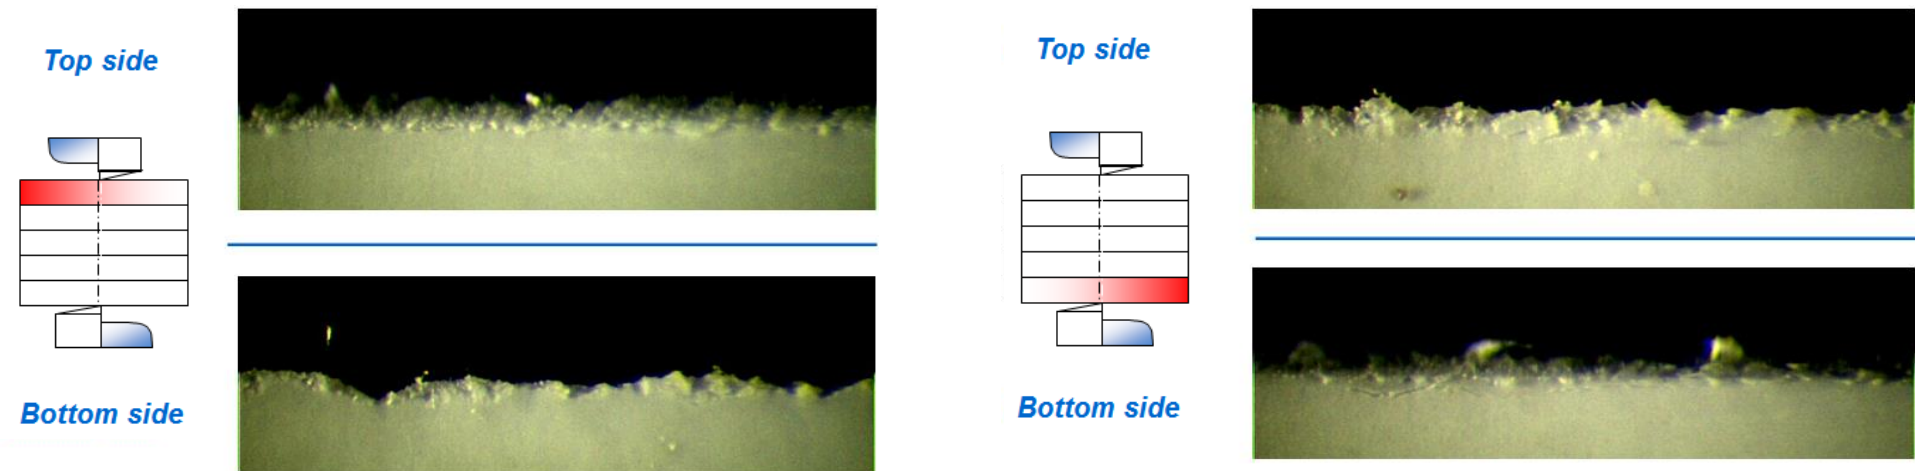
Burr observed at the cross cut when cutting 5 sheets - silk paper 170 g/m² (left: first leading edge / right: last sheet trailing edge)
